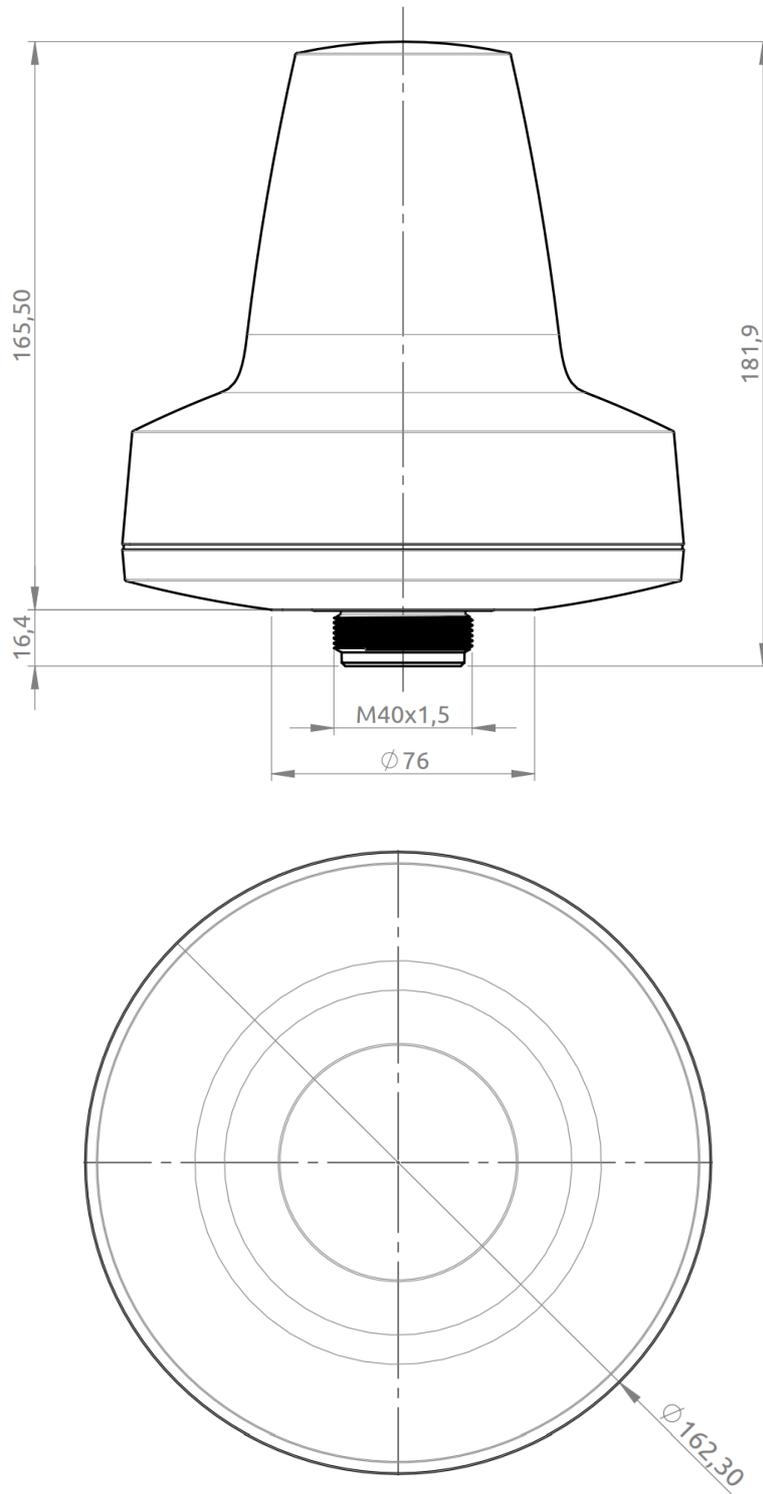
Outline Drawing: LT-4130 Antenna Unit
